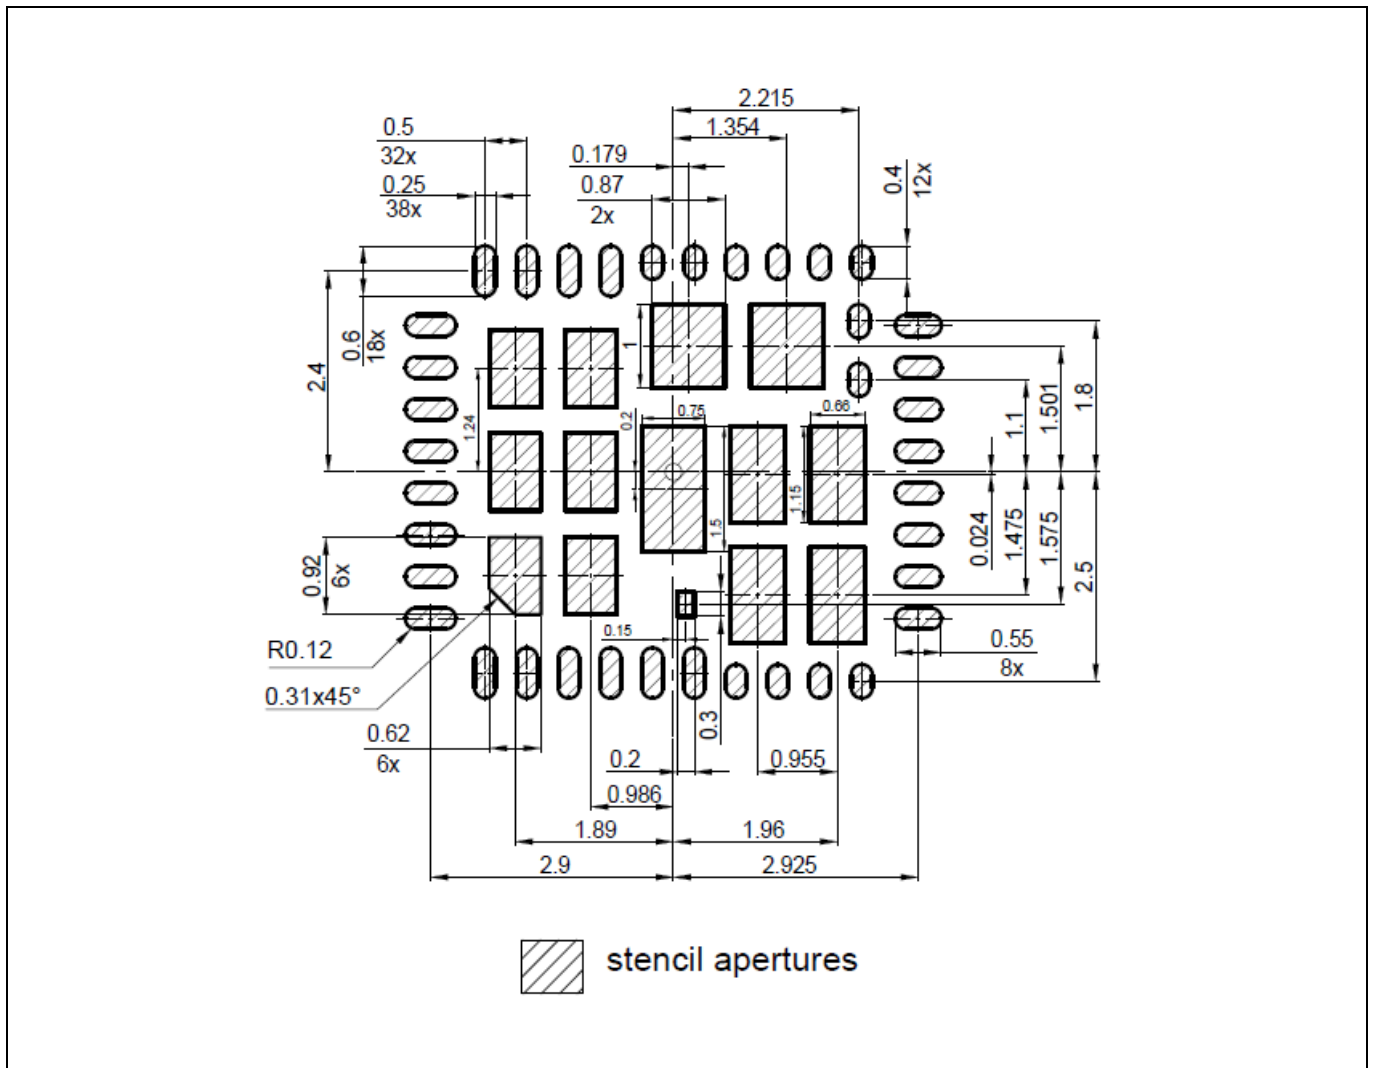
Stencil pad size and spacing (all dimensions in mm)
